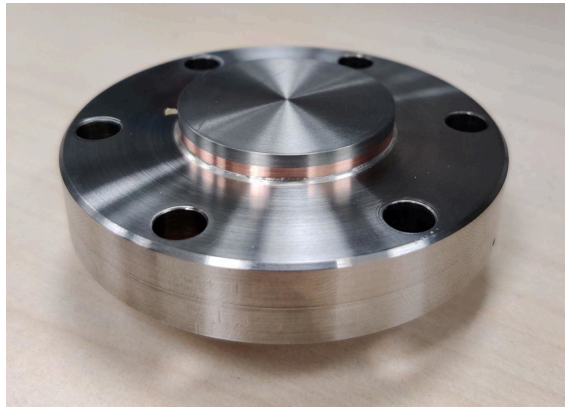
A sample flange after soldering and drilling the thermometer mounting hole.
